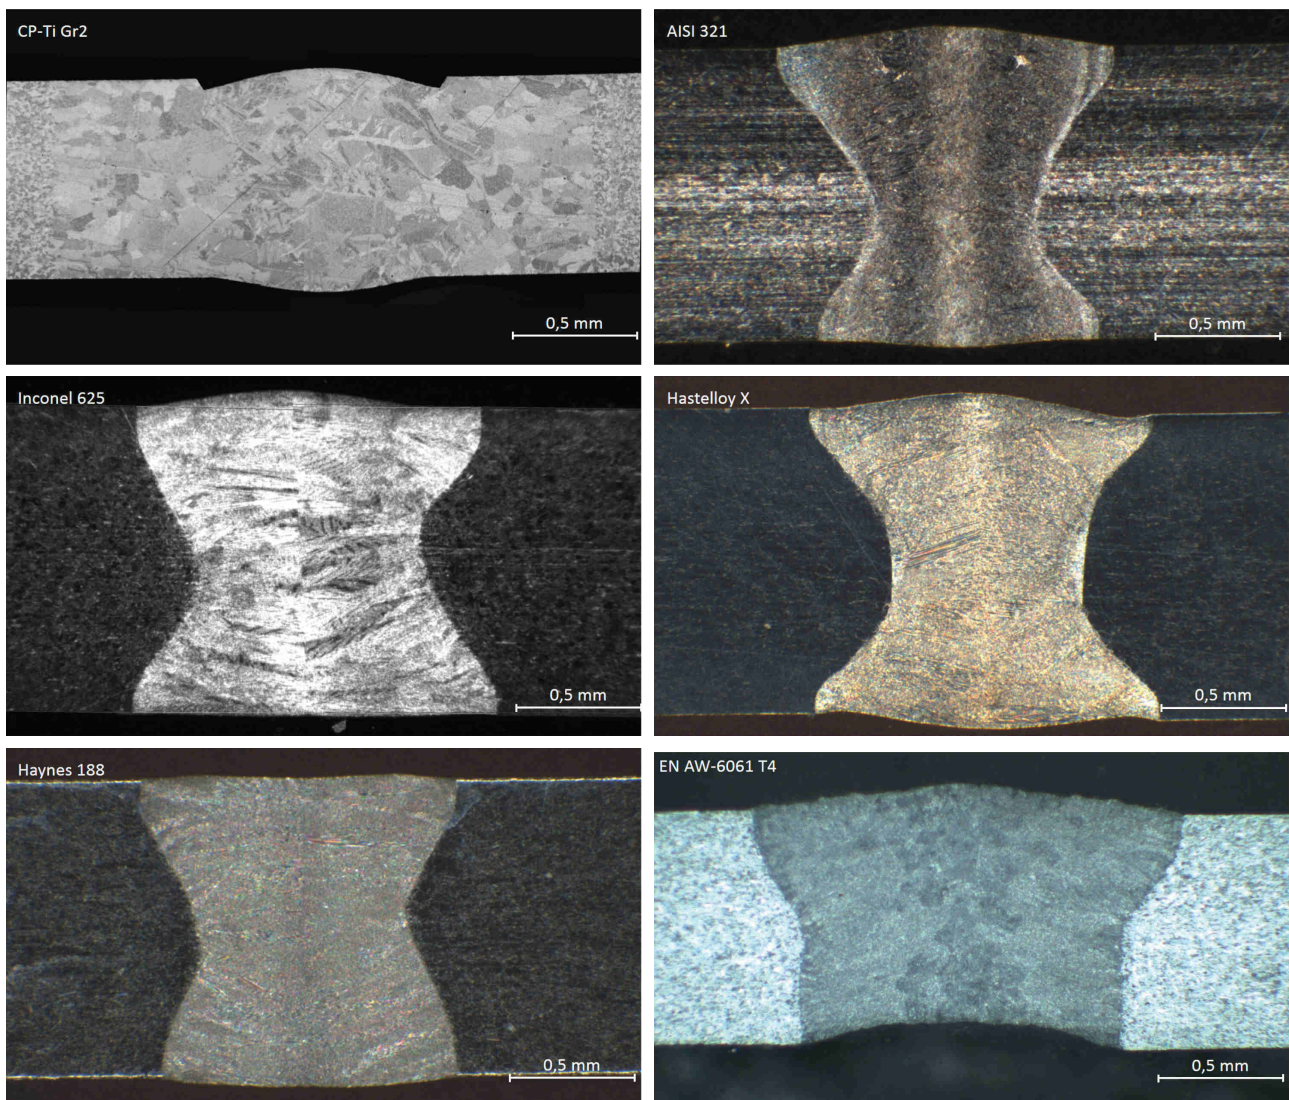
Optical macrographs of welded samples using S4 process parameters (Outer fiber welding for all alloys except for AW 6061, welded using core fiber).
